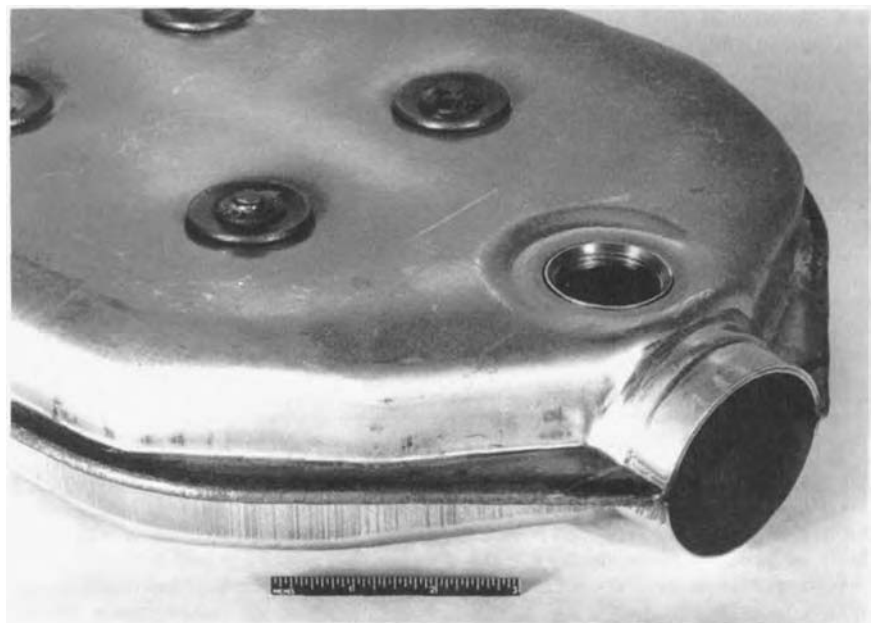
Catalytic converter assembly consisting of seams joined by the nonvacuum electron beam welding process
